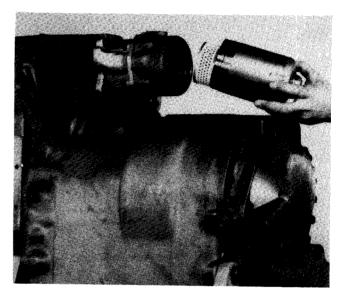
Remove filter element housing and element. NOTE: It is recommended a small pan be used to catch remaining oil in element housing.
